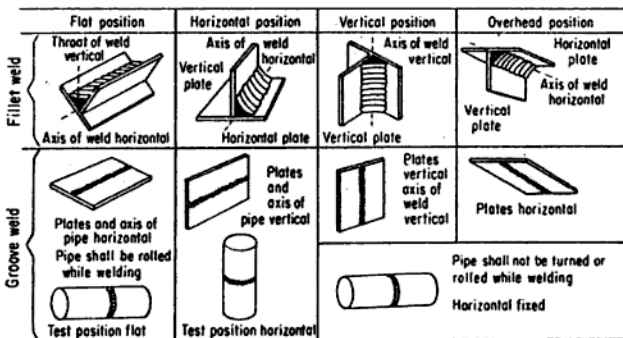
Welding positions necessary to perform for weldor qualifications.
